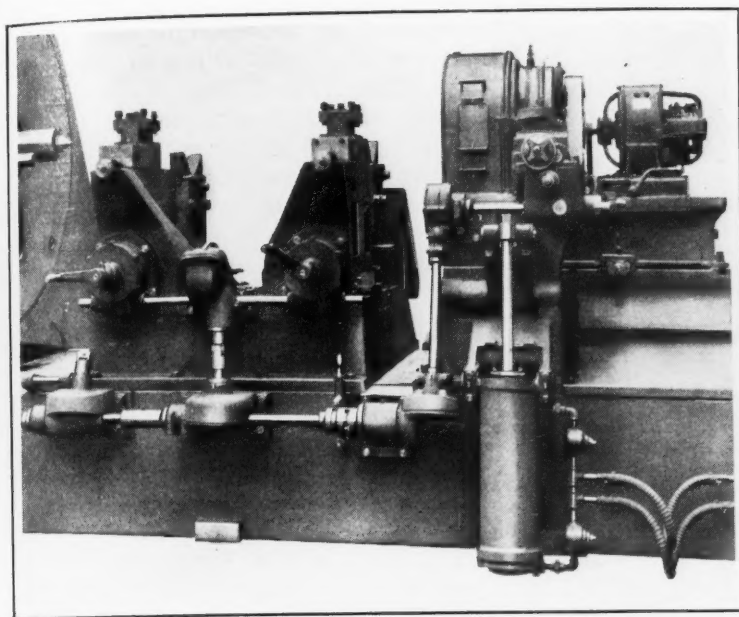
Special Rest which Permits Turning at One Setting Both Journals of Center-crank Axles for Three-cylinder Locomotives
